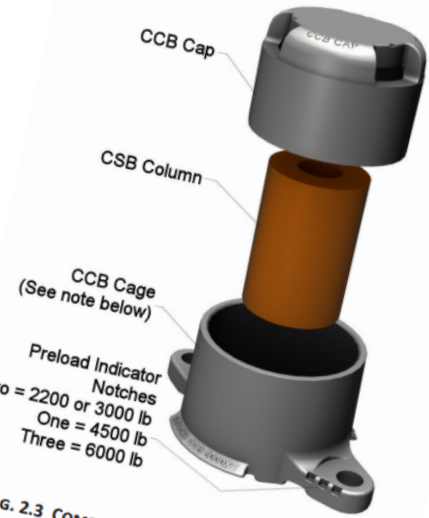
COMPACT COLUMN SIDE BEARING
